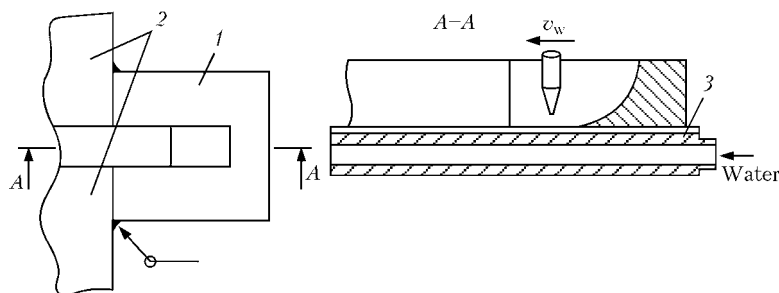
Schematic of welding by using runoff tab: 1 — runoff tab; 2 — plates to be welded; 3 — forming backing
